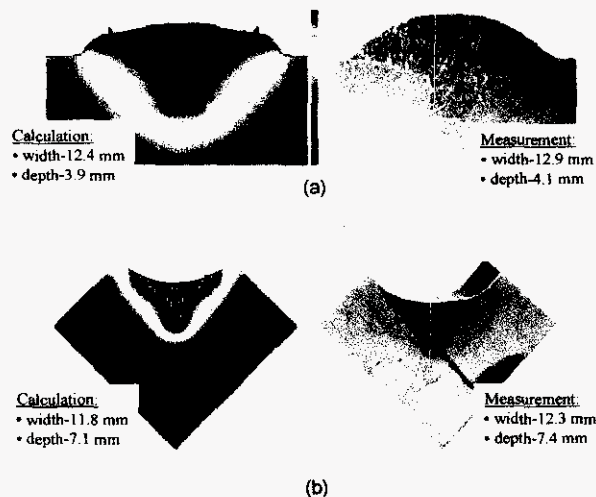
Weld profile comparison between calculation and measurement for (a) bead-on-plate and (b) 45 degree T-fillet weld.
